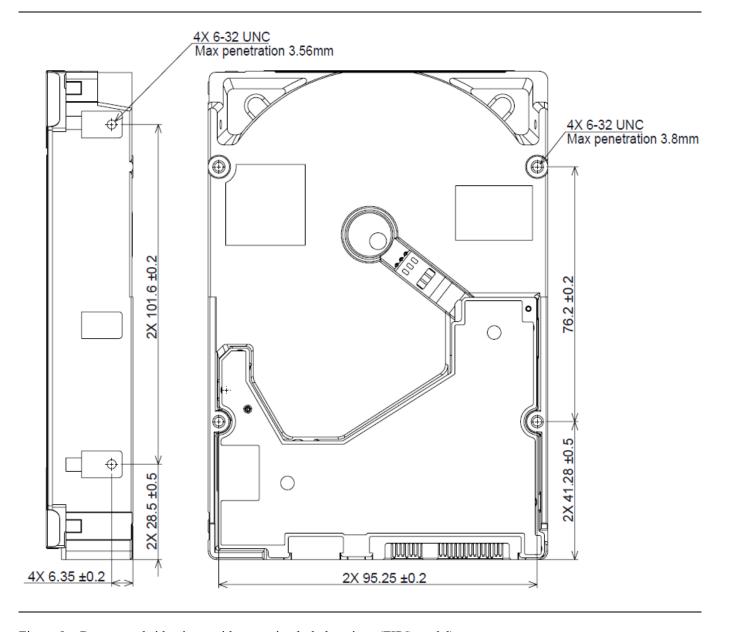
Bottom and side views with mounting hole locations (FIPS model)
